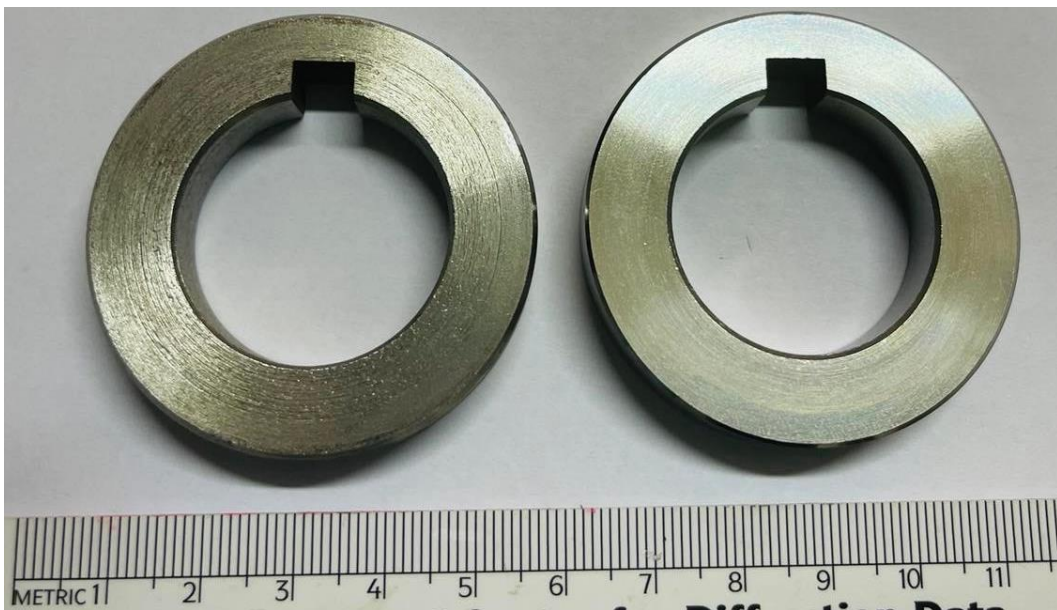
Photograph of the wheel and rail discs after machining showing the keyway.
